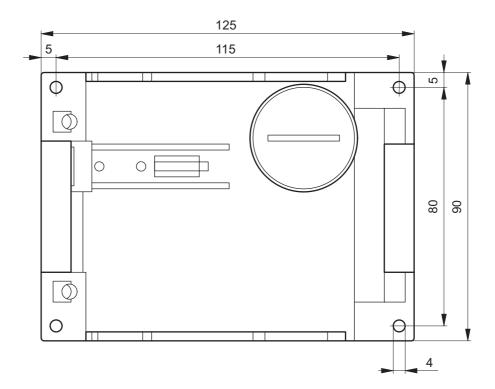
Dimension drawing for SCALANCE W-780 and SCALANCE W-740PRO/RR
